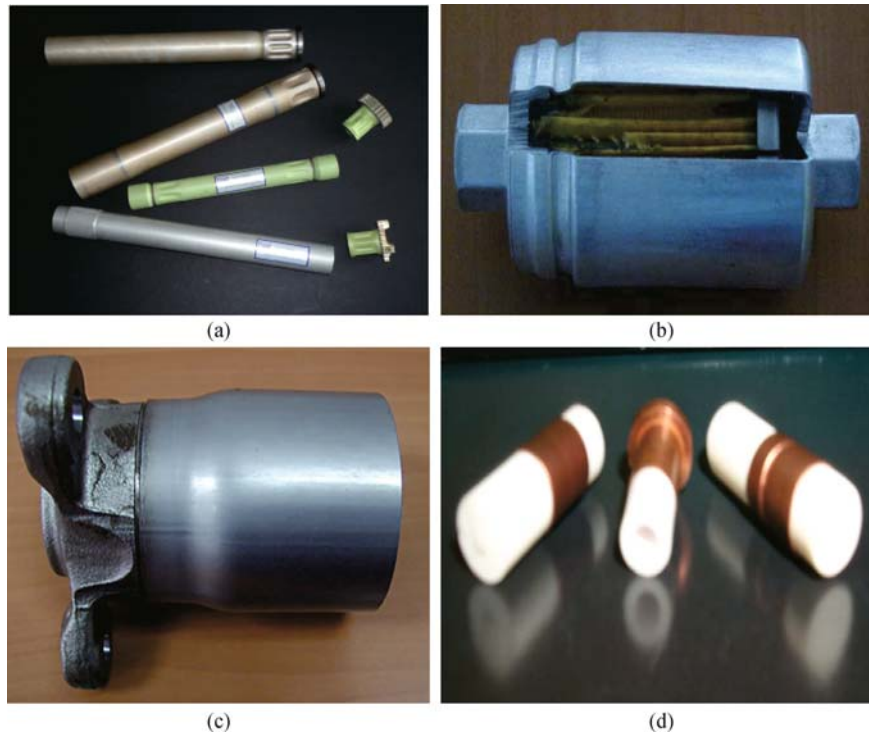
Applications of electromagnetic welding. (a) Aircraft flight control tubes (Copyright Elmag Inc., San Diego CA 2015) [37]; (b) Al fuel filter [4]; (c) Al/steel driveshaft (Pulsar Ltd.) [4]; (d) alumina/Cu accelerator parts [36]
